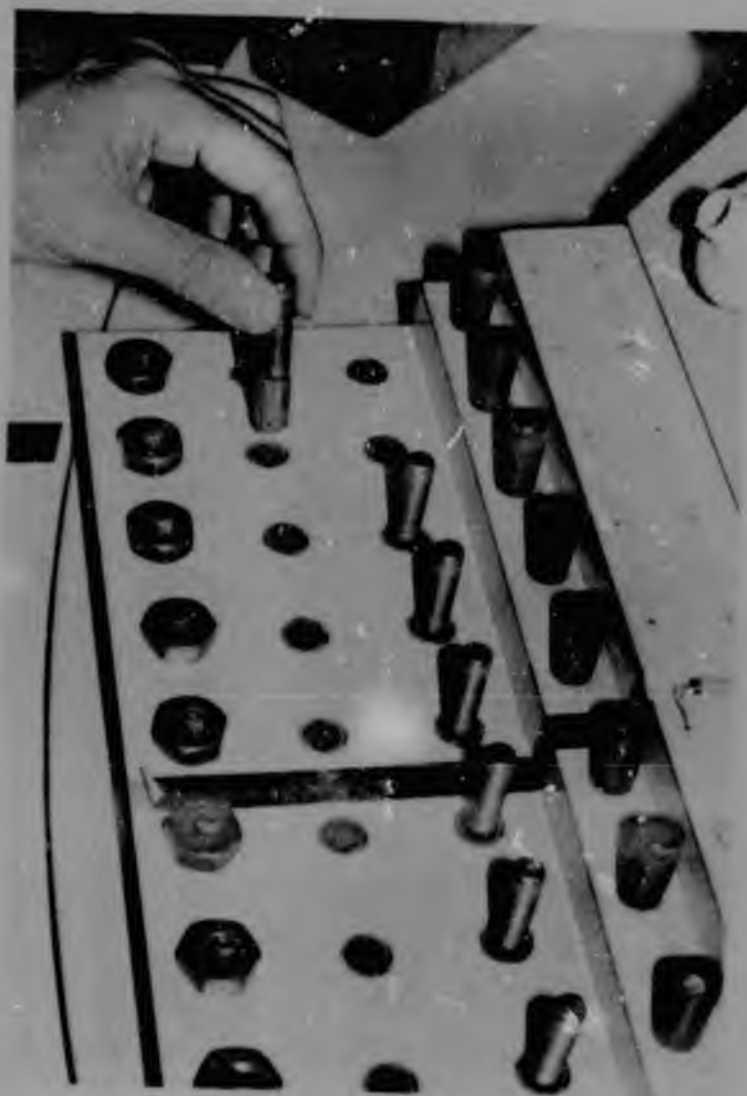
Test 33 showing the left hand about to position the second bolt in the hexagonal jig in front of its original position
